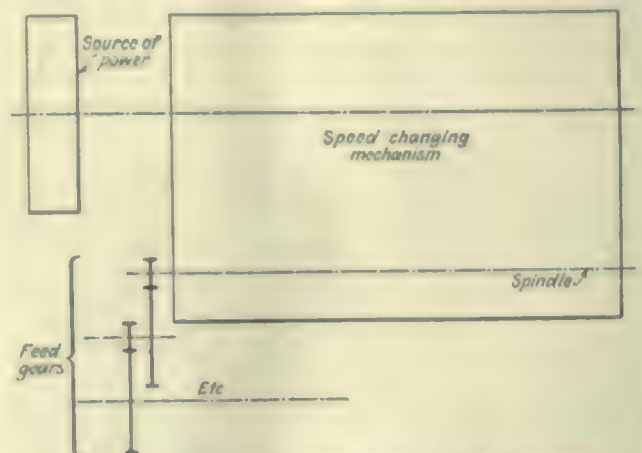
DIAGRAM SHOWING USUAL ARRANGEMENT OF LATHE DRIVE AND FEED GEARS
